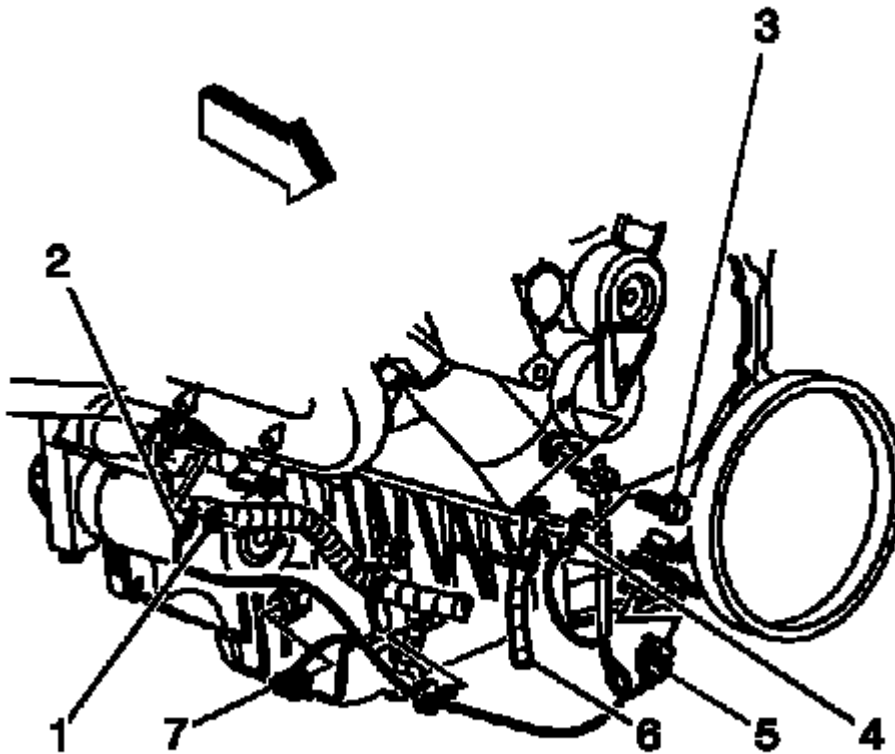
View Of Oil Level Sensor Electrical Connector, CKP Electrical Connector & Battery Ground Bolt
